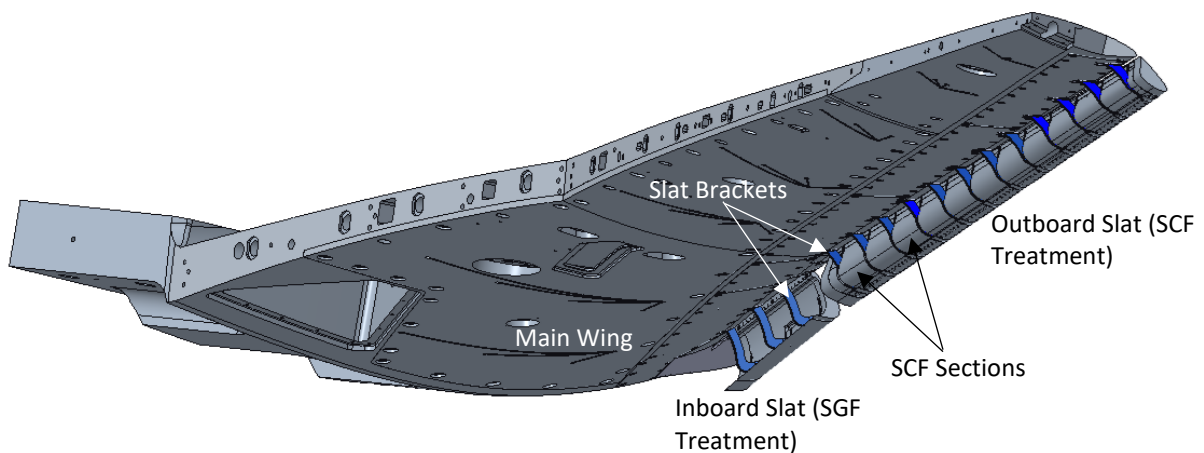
CAD image of CRM-HL wing (without trailing-edge section) showing detail of inboard and outboard slats.
